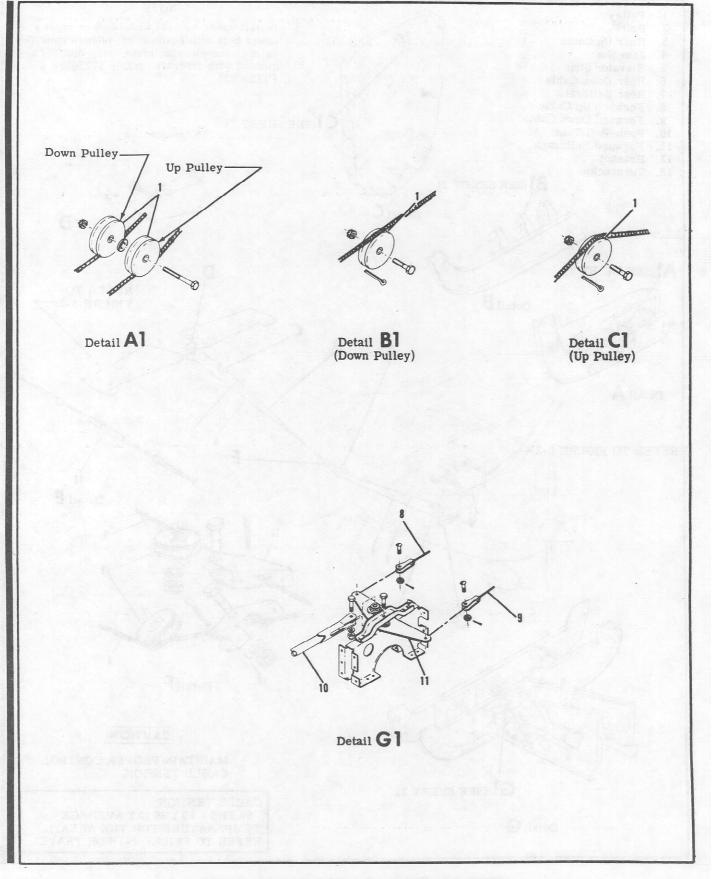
Elevator Control System (Sheet 2 of 2)
